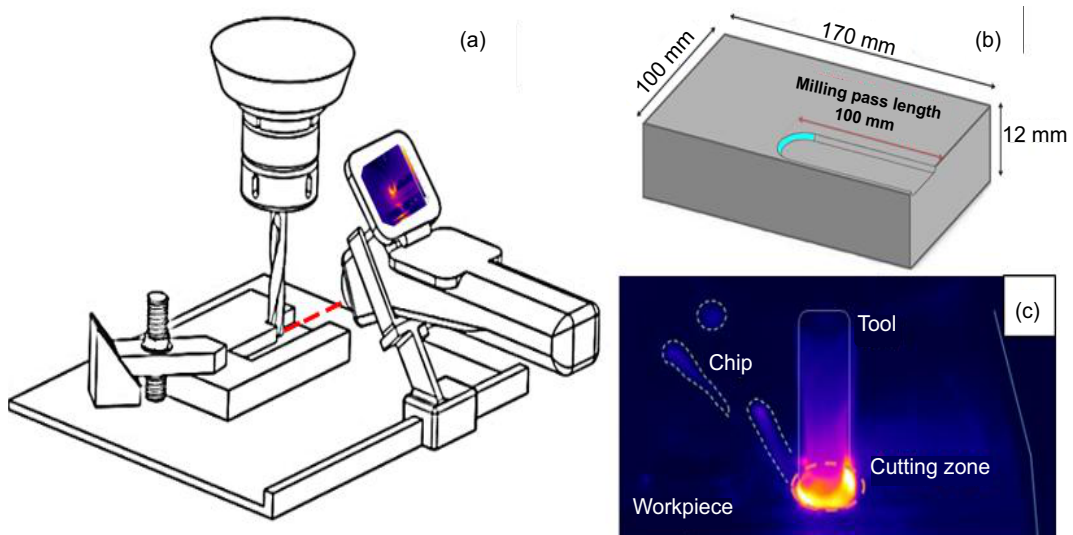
(a) position of the camera, tool, and workpiece, (b) schematic view of a sample cutting test, (c) example of the thermal image of a workpiece obtained with some details during milling
